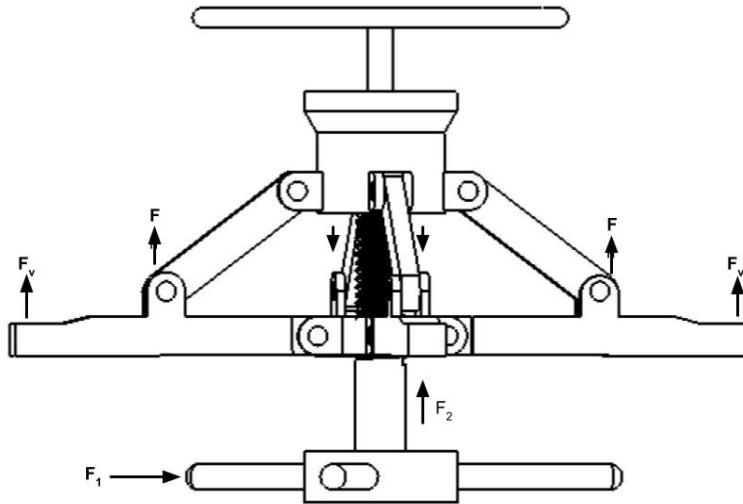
Free Body Diagram of Hatch Locking Mechanism Assembly
